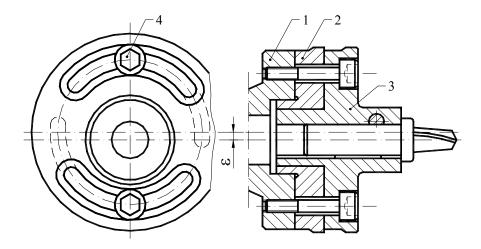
Fitting with eccentric: 1- body; 2- eccentric axle-box; 3- axle-box for centering and tightening of the device; 4- clamping screws. 2-
